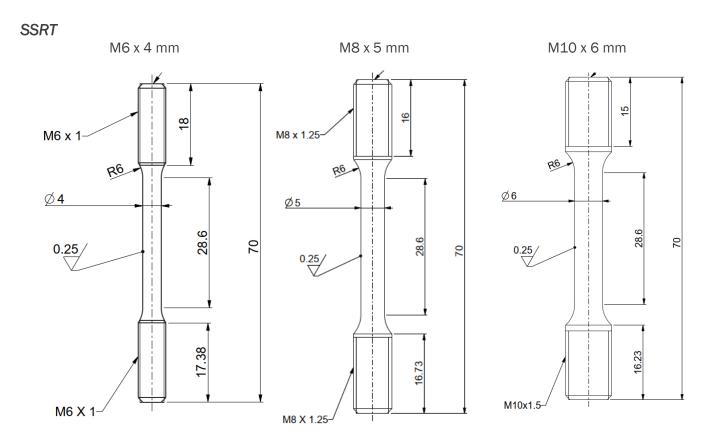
SSRT without notch specimen plans, proposed by RINA.
